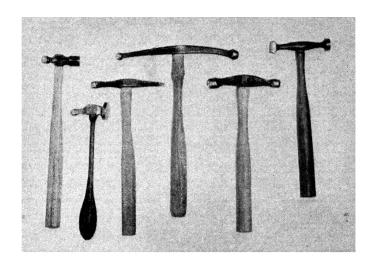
Hammers used in art metalwork. Ball peen, French chasing hammer, and raising and planishing hammers.
